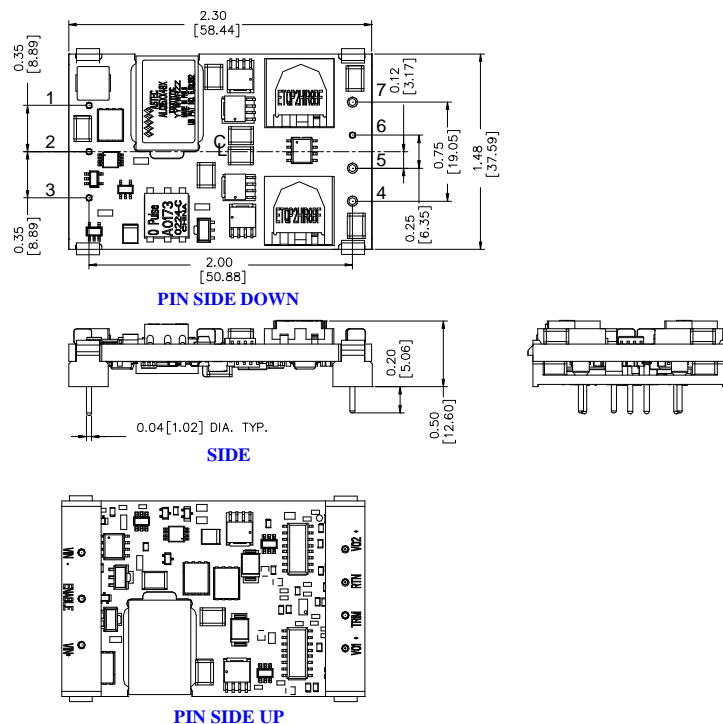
ALQ15 series mechanical outline (inches [(mm)].
